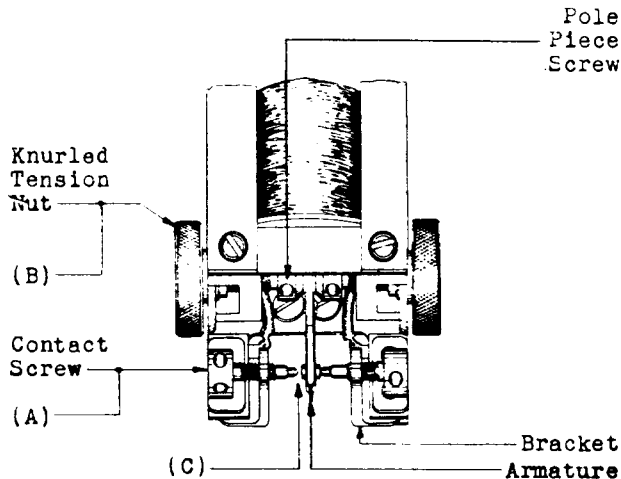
Tightness of Contact Screw and Pole Piece Knurled Tension Nuts and Contact Travel.
